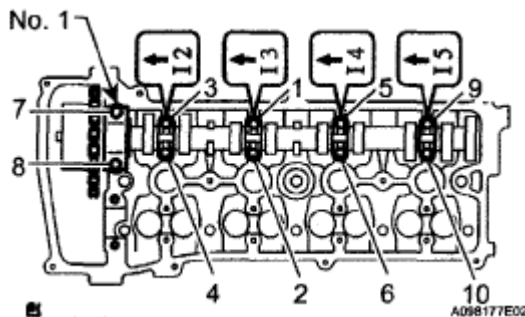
Identifying Bearing Cap Bolts In Sequence
